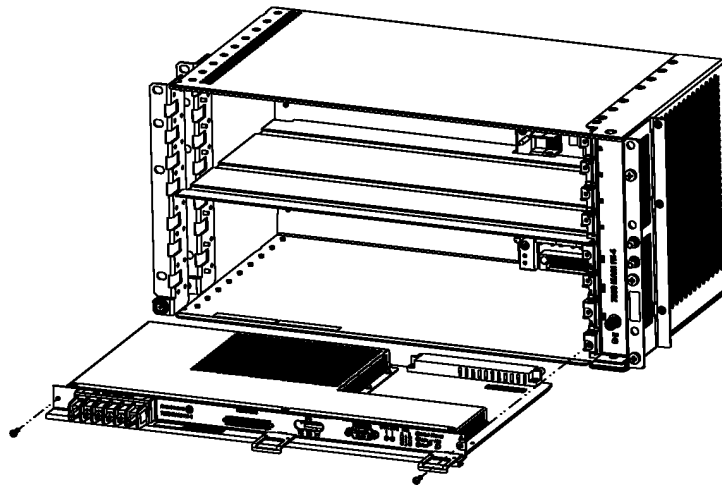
Remove safety cover and power cable screws on 7360 ISAM FX-4
